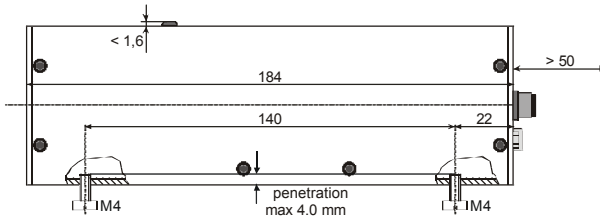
mechanical dimensions (side view) of the MTE LTDB; all measures in mm
